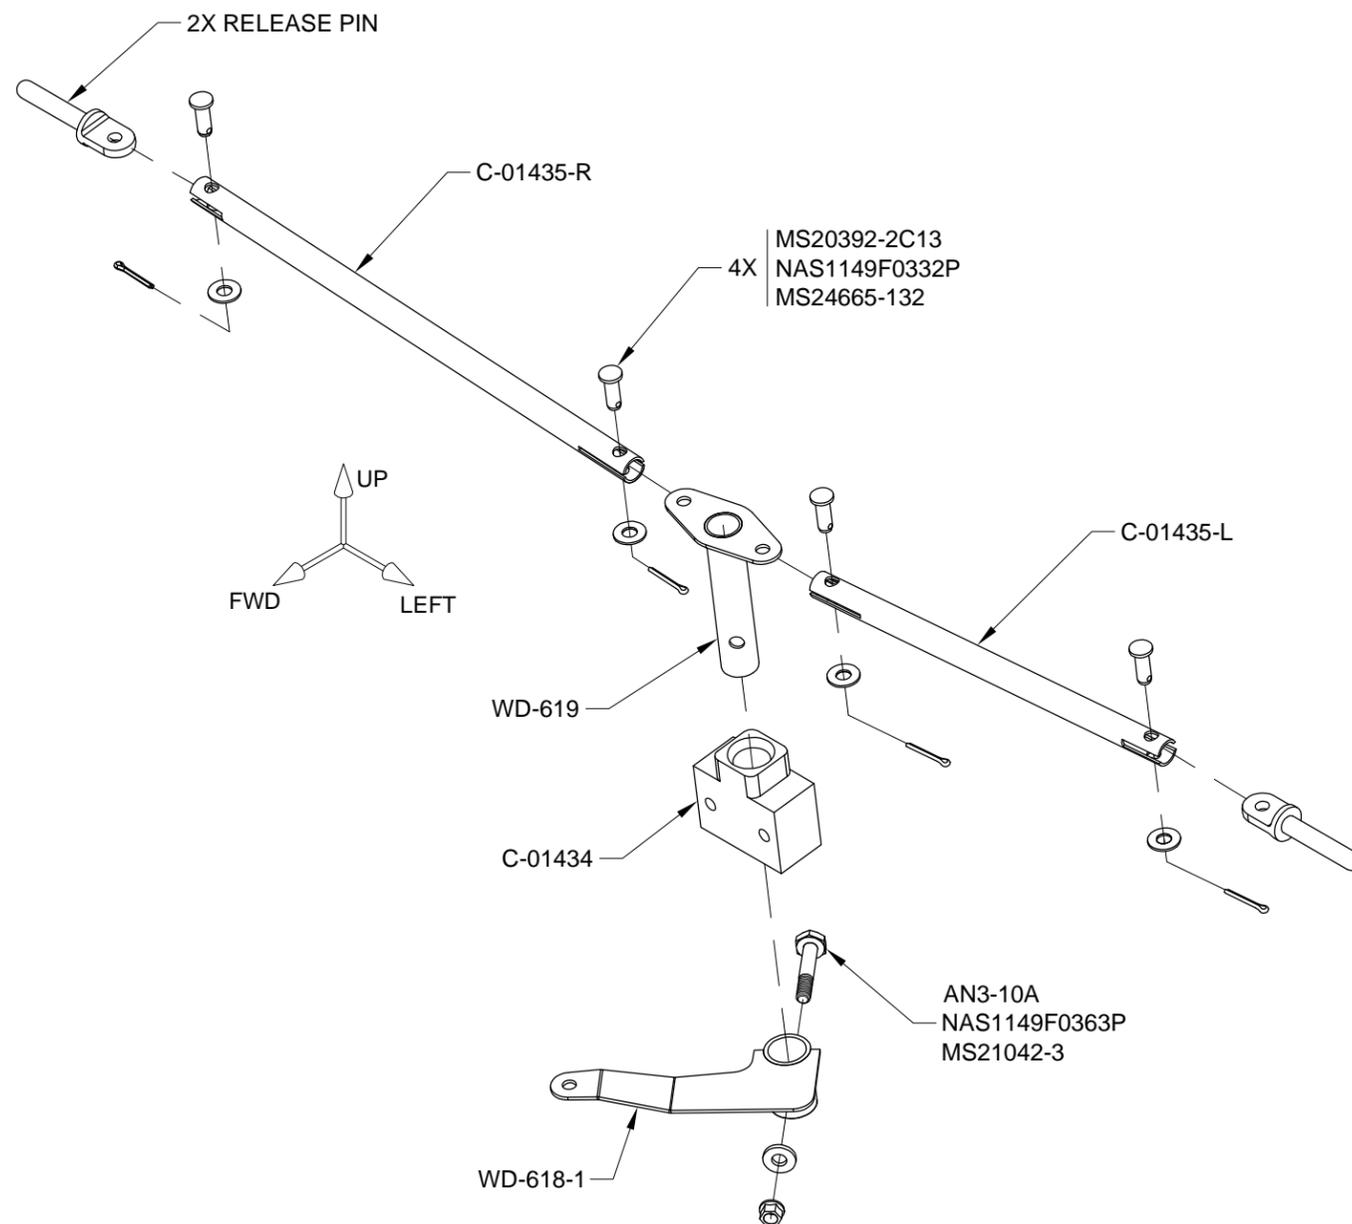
ASSEMBLE RELEASE MECHANISM
